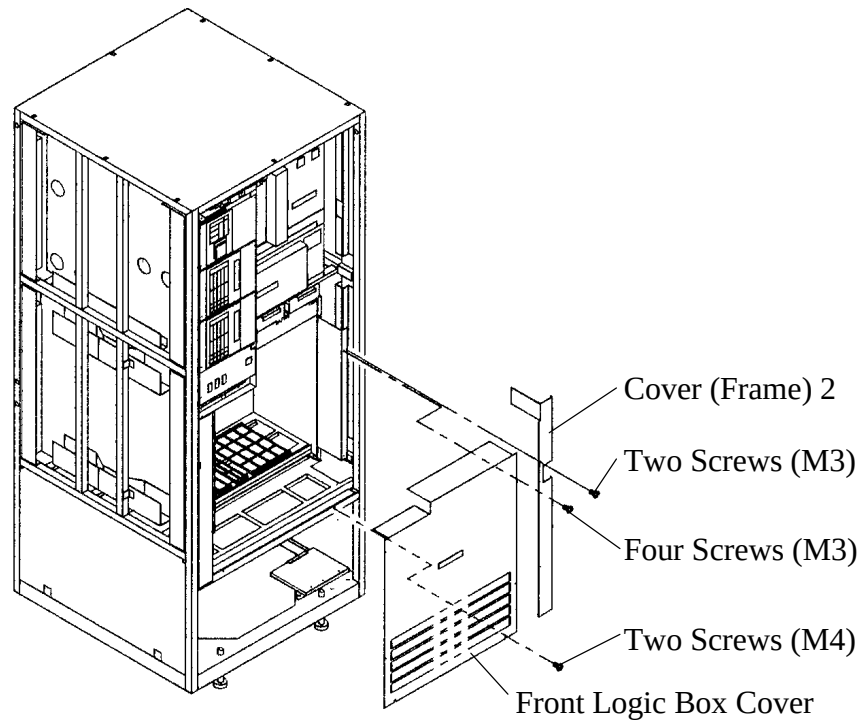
Removal of Covers (DKC front side)
